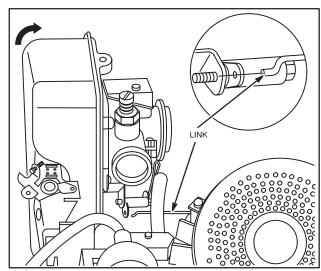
REMOVING FUEL TANK ASSEMBLY
